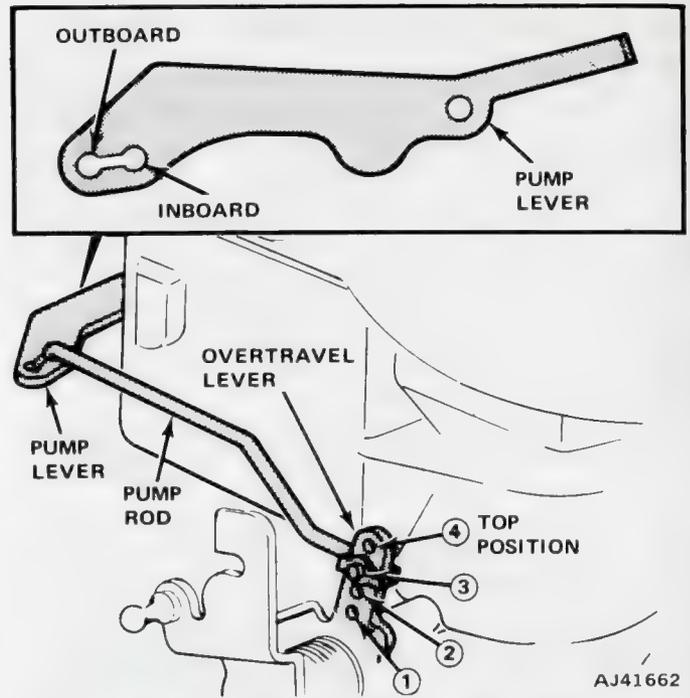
J-111 Accelerator Pump Stroke Adjustment
